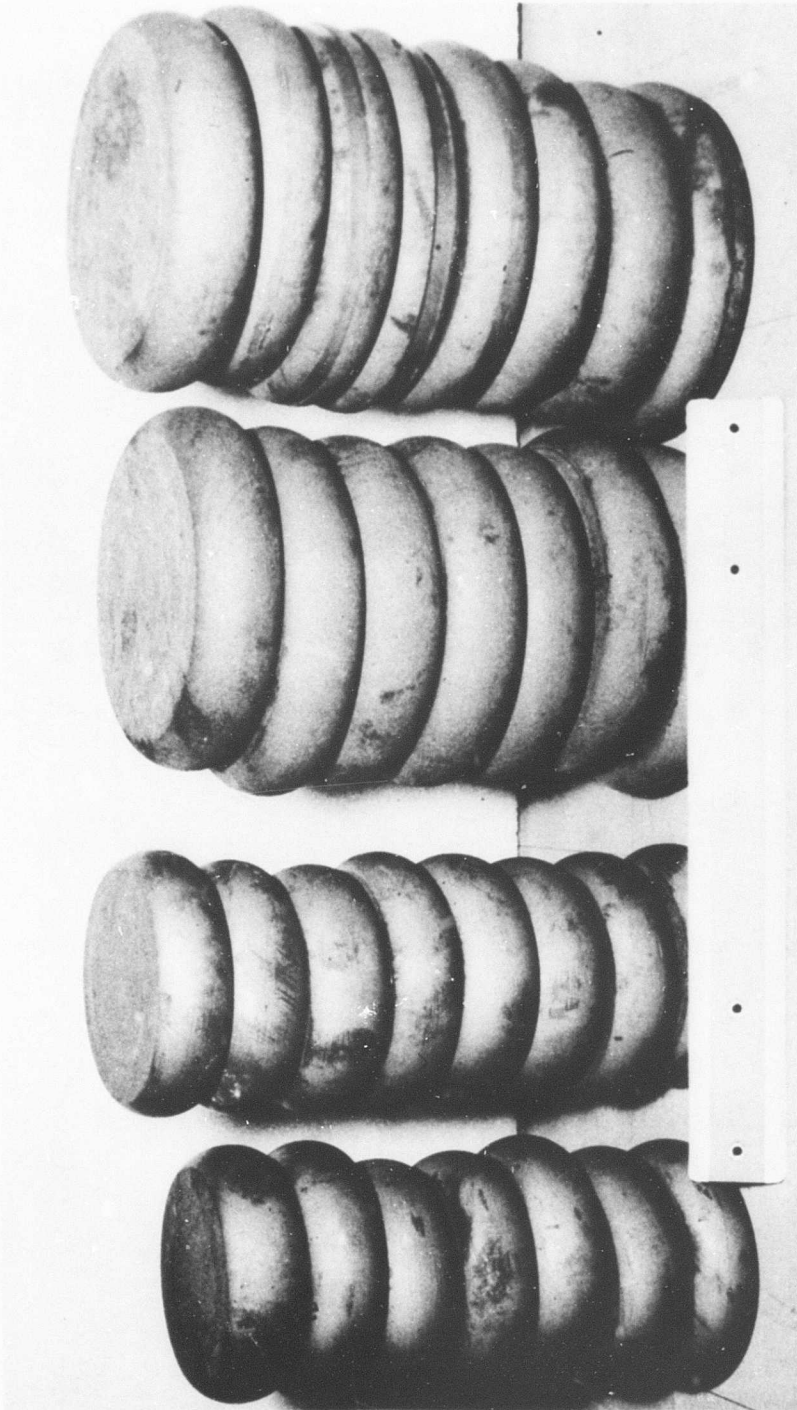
3-Inch - and 5-Inch-Diameter Upset Forgings.
